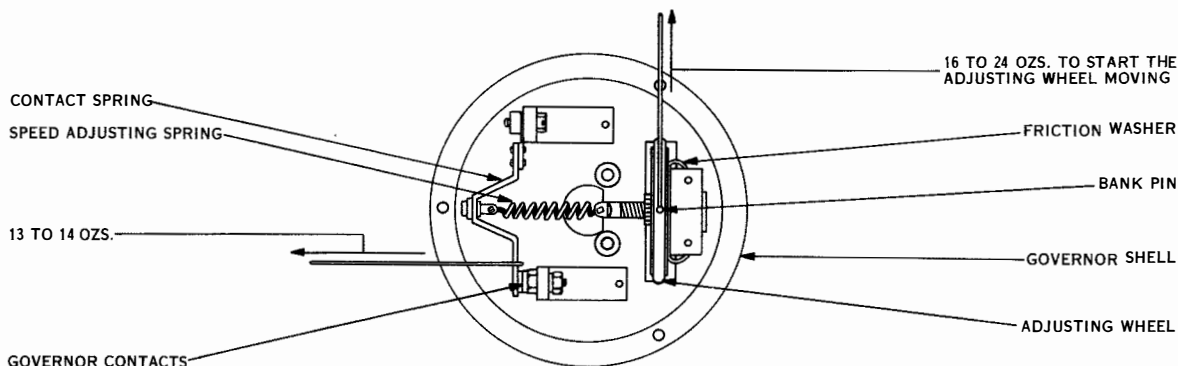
Governor Contacts, Speed Adjusting Wheel Friction Washer Spring, and Speed Adjusting Spring
